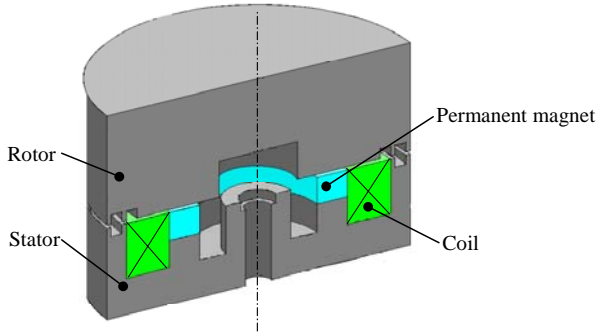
schematic drawing of lower semi-passive magnetic bearing
